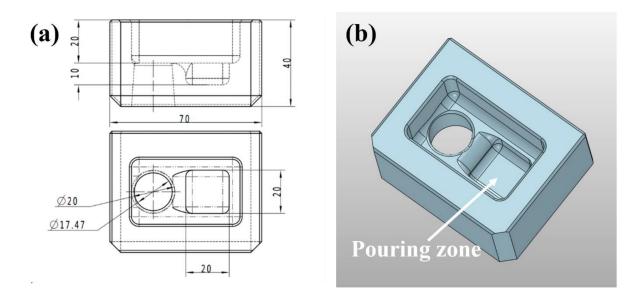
(a) 2D and (b) 3D drawings of the pouring basin
